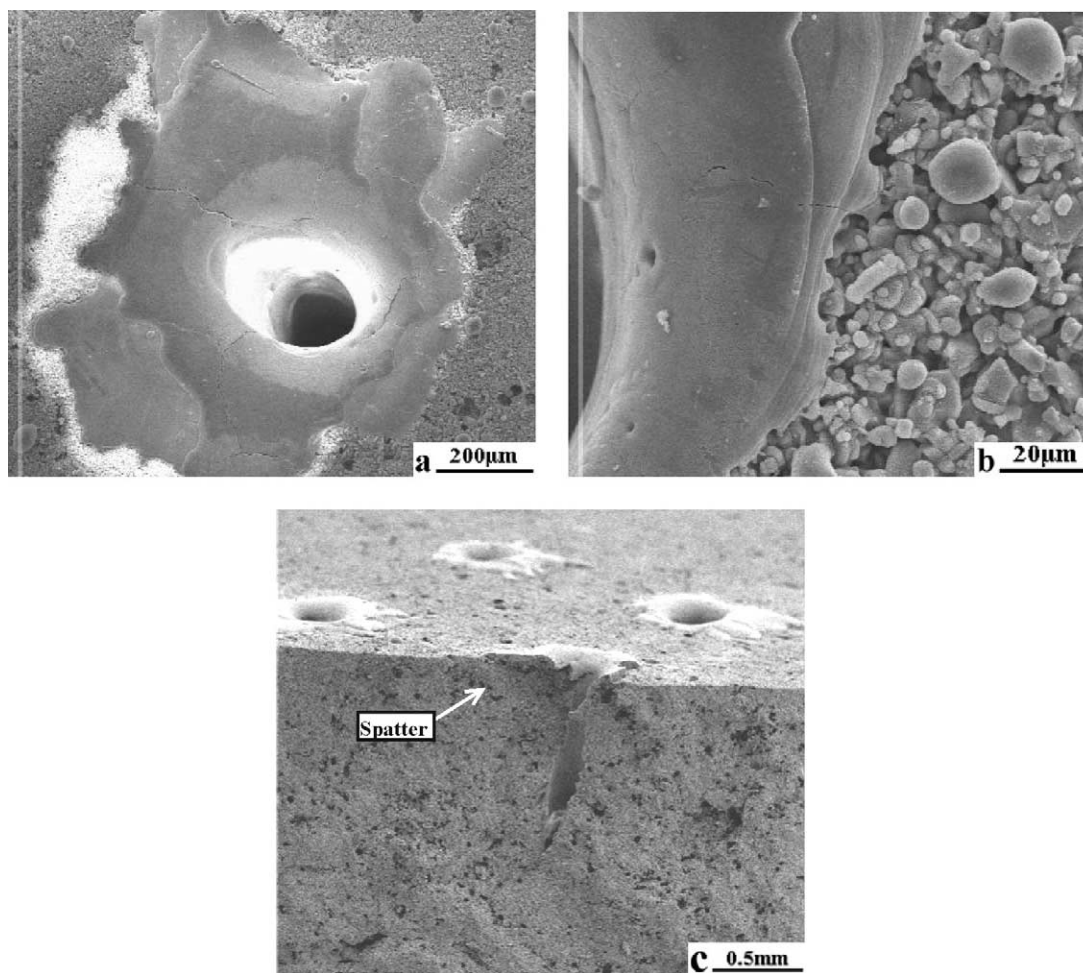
SEM micrographs of the holes drilled on the sintered alumina body: (a) Top view; (b) Illustration of spatter on the edge of the hole; (c) cross section of the hole.
